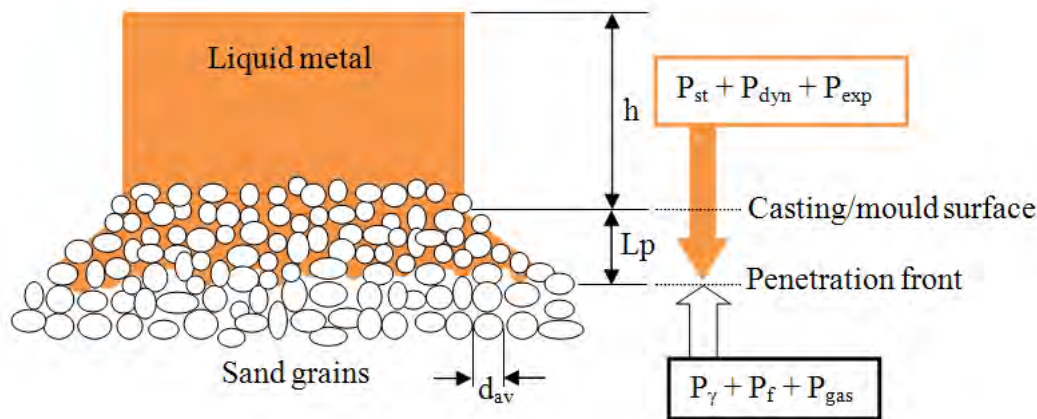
Proposed model for the thermo-mechanical degradation of the moulding materials at the core-metal interface during metal penetration.
